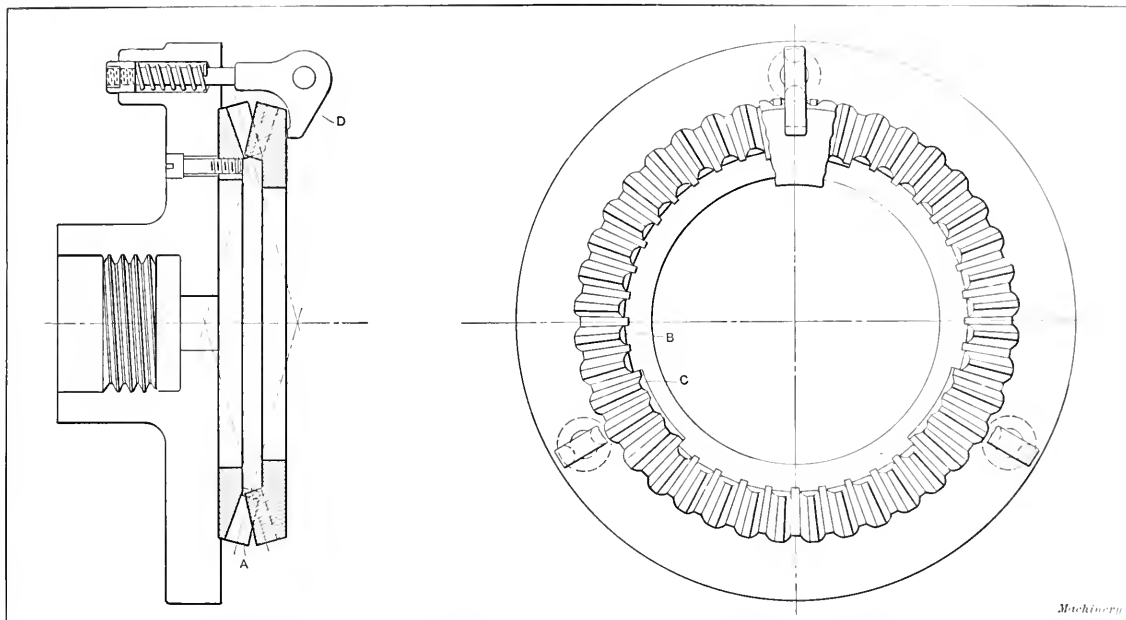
Chuck for Bevel Gear having a Master Gear against which the Work is clamped
